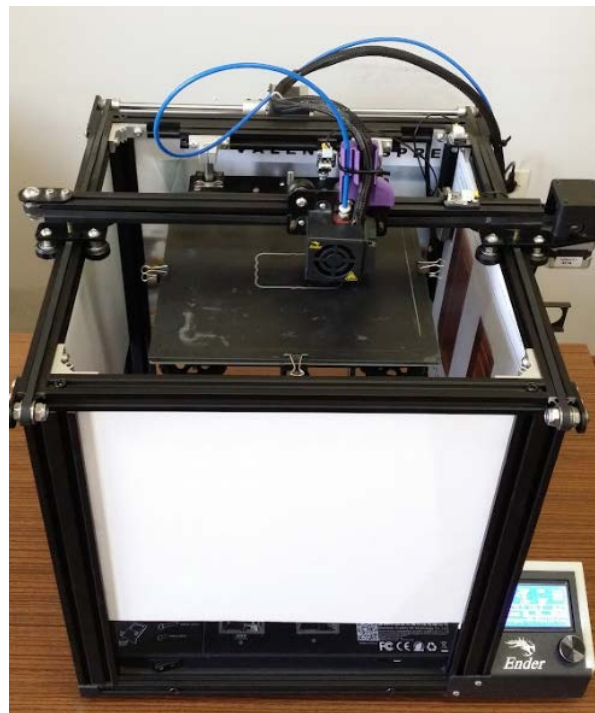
Ender 5 3D printer used for the production of tensile specimens.
